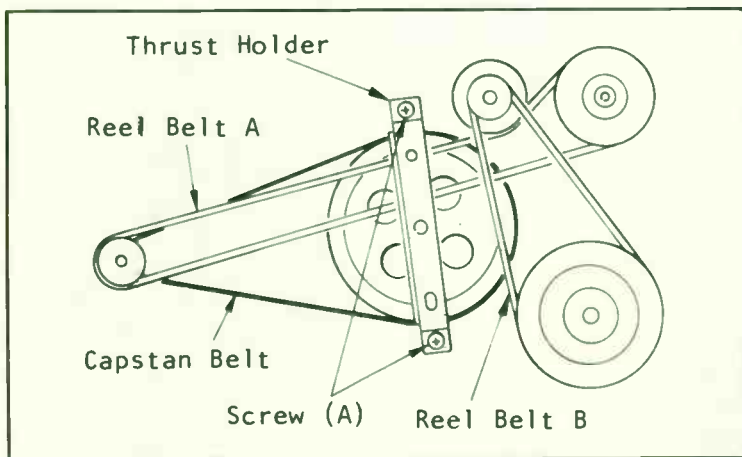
Reel belt drives (courtesy of Magnavox).
